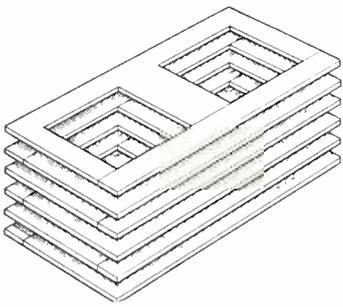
Exploded view of input transformer laminations, showing interleaving arrangement.
